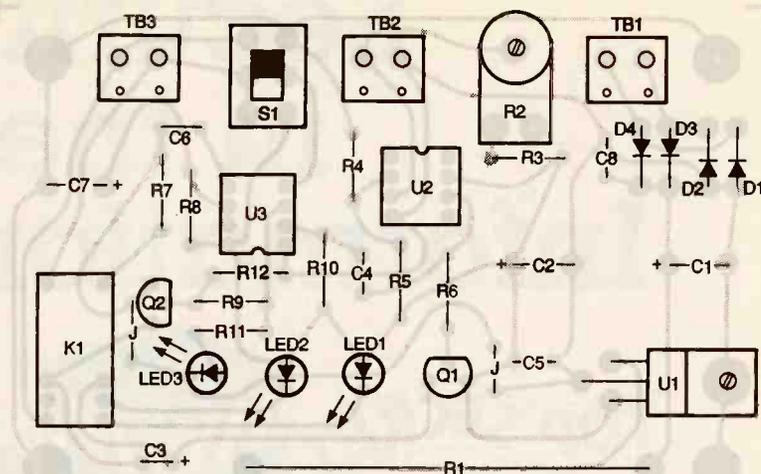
Assemble your unit using this parts-placement diagram as a guide. Be sure to leave a 1/4-inch space between the PC board and R1 for ventilation.
